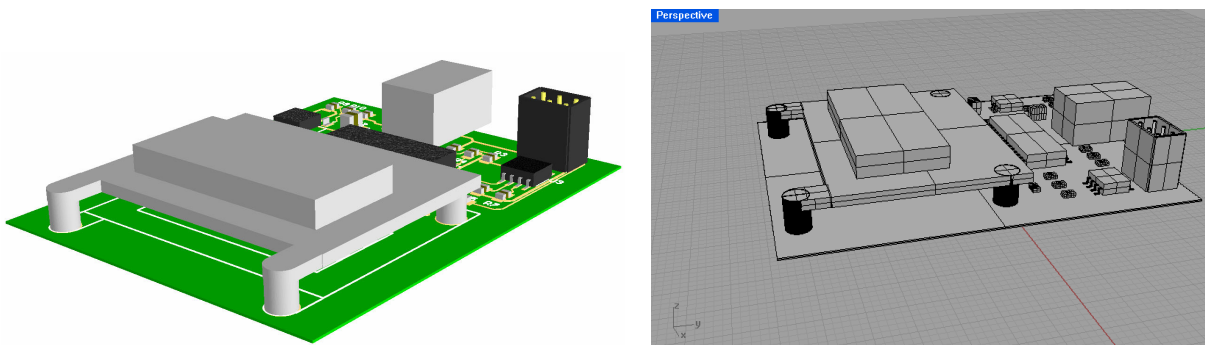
View the board in Altium Designer's 3D viewer and then export to IGES, ready for import to your MCAD application.
